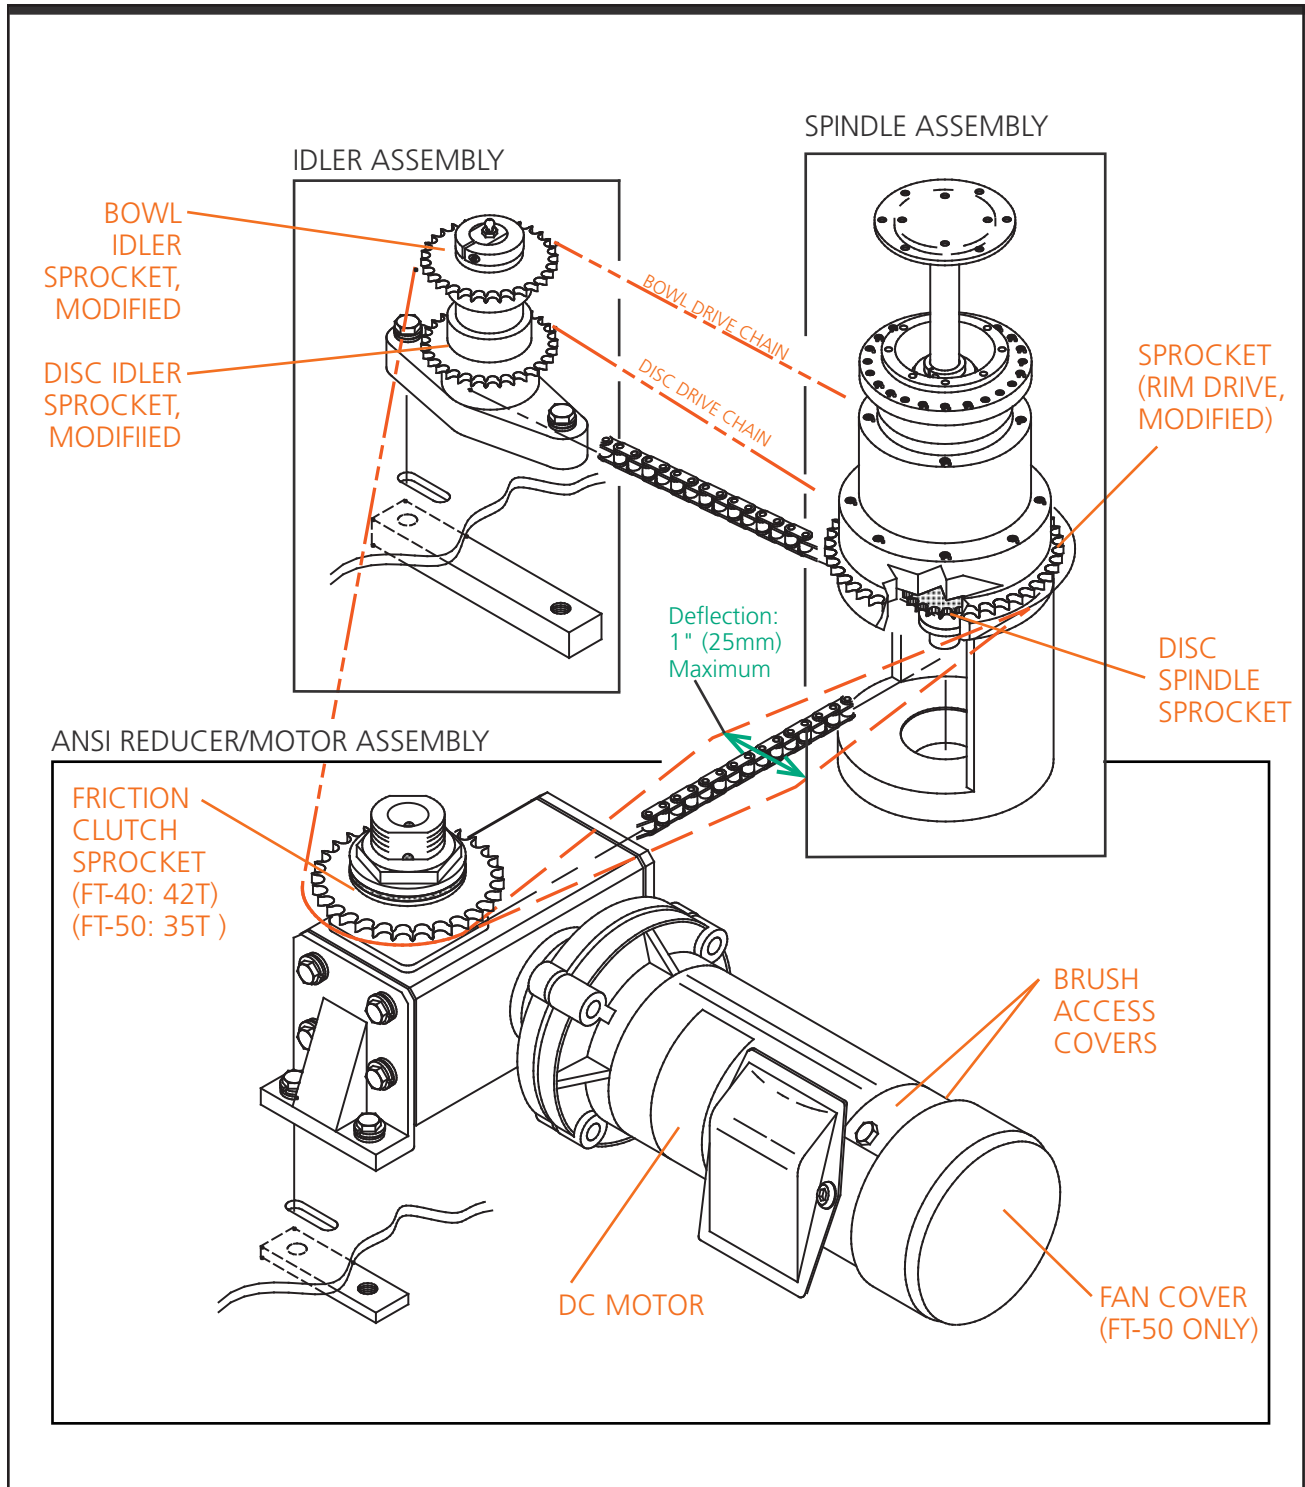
Bowl Drive Chain Tension -Typical DC Motor
